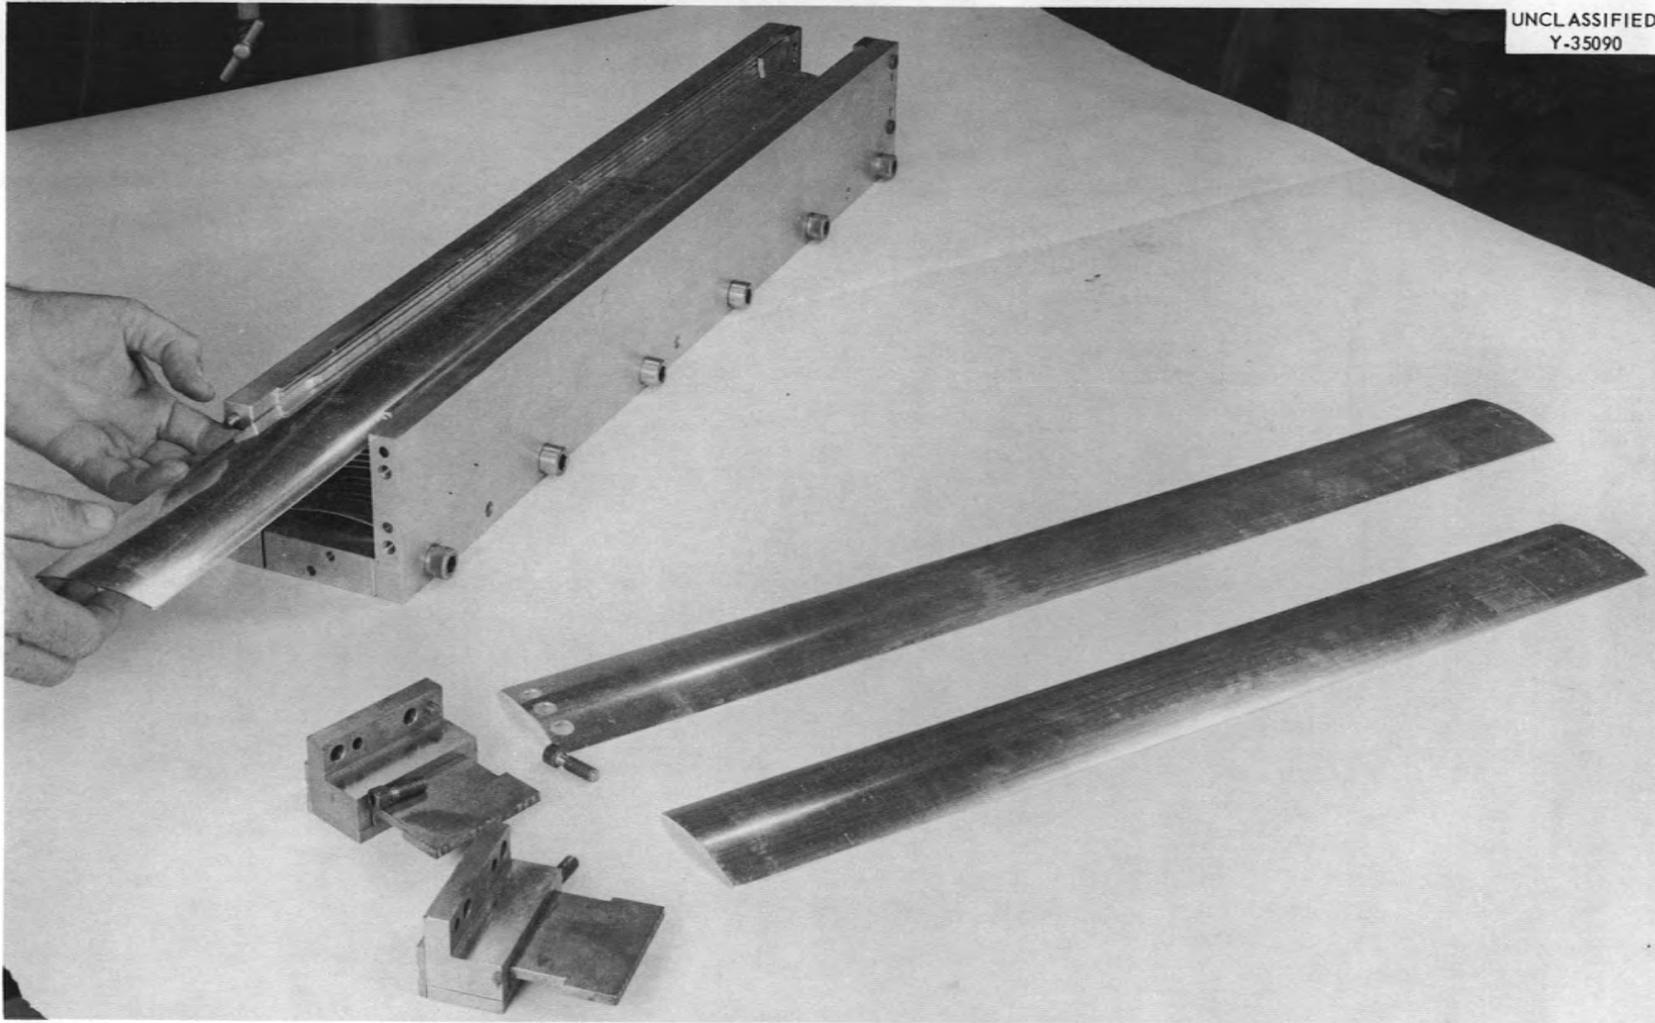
Fixture for Assembling Pinned Fuel Element.
